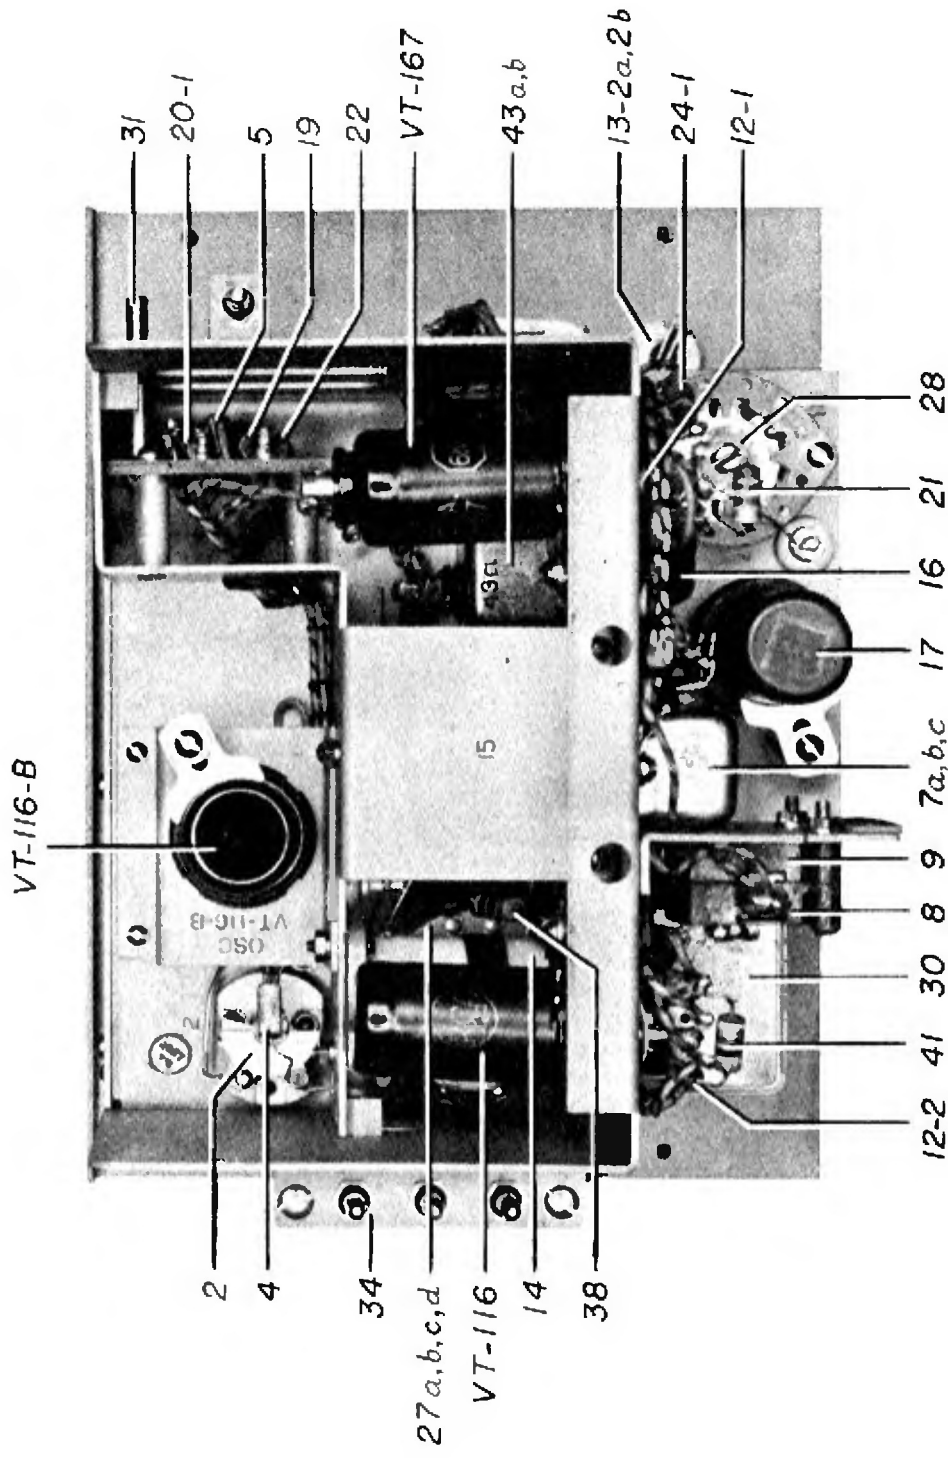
FREQUENCY METER BC-221-M, CHASSIS REAR VIEW
